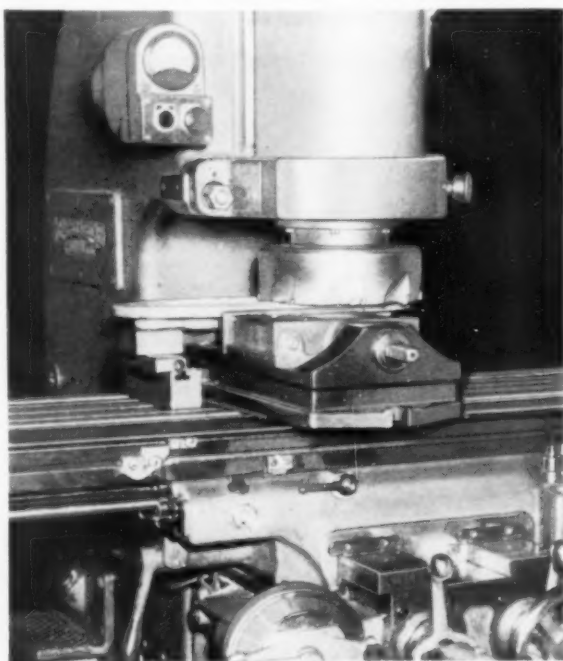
, left, shows a contoured spar cap being milled on an Onsrud machine in the Lockheed plant. Fig. 6, right, is a picture of a knee-type
